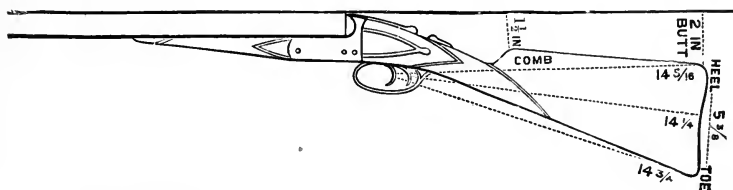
TO TAKE THE MEASUREMENT OF A GUN STOCK.
